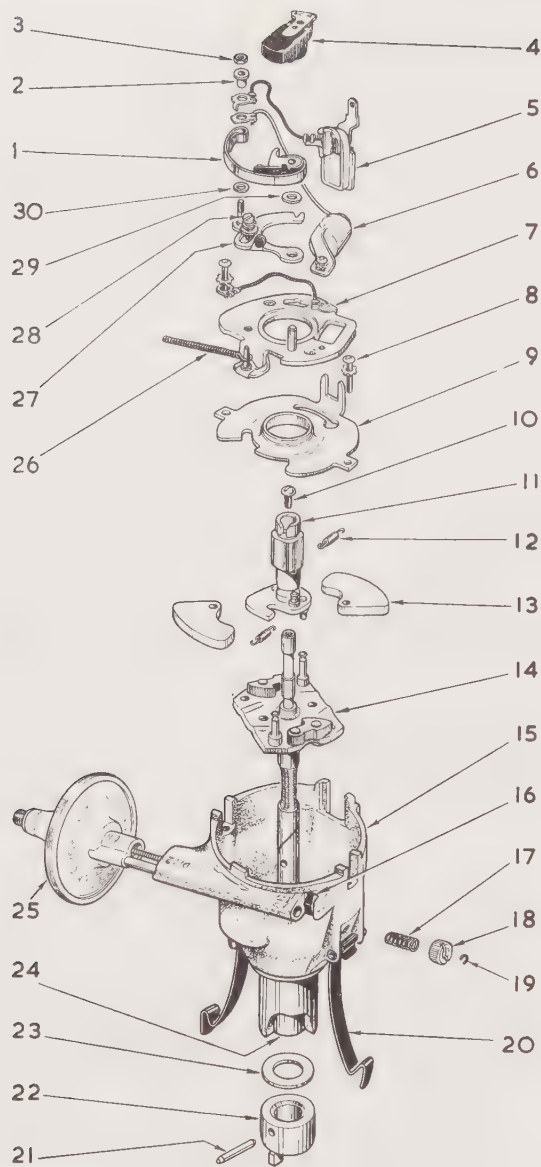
1 Component parts of Lucas distributor assembly. (Tachometer drive not shown).
